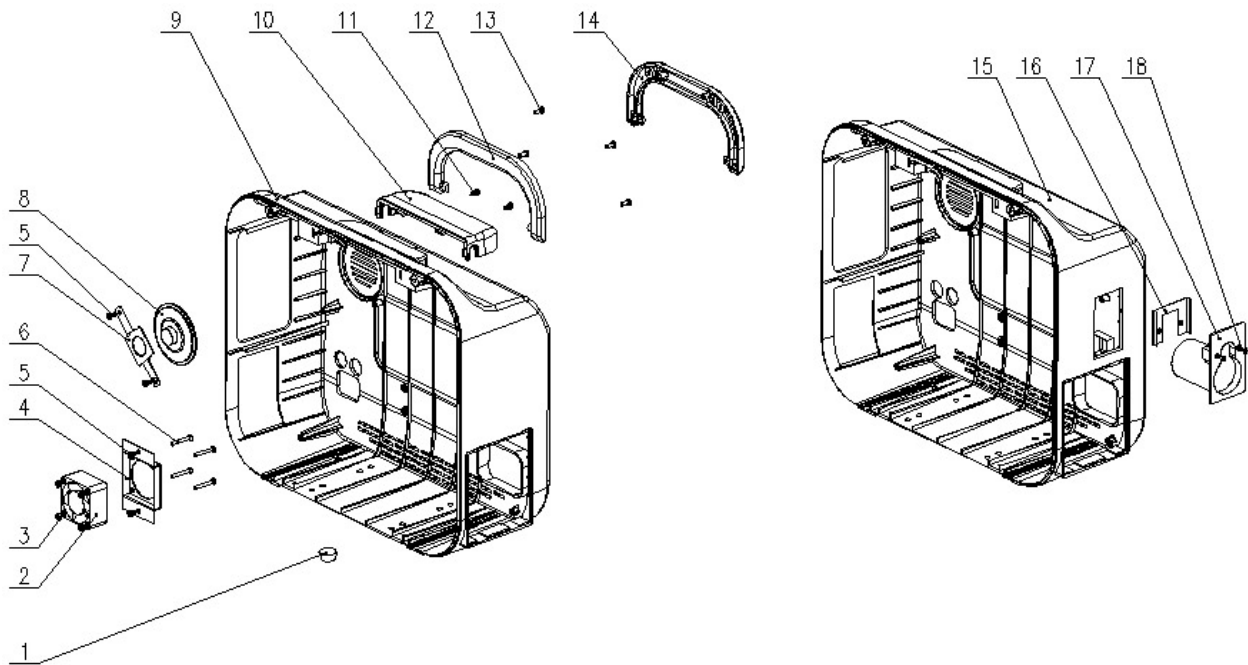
M9 Series Monitor Front Shuck Assembly
